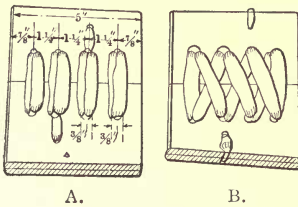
A WEAK JOINT—HOLES TOO LARGE.
